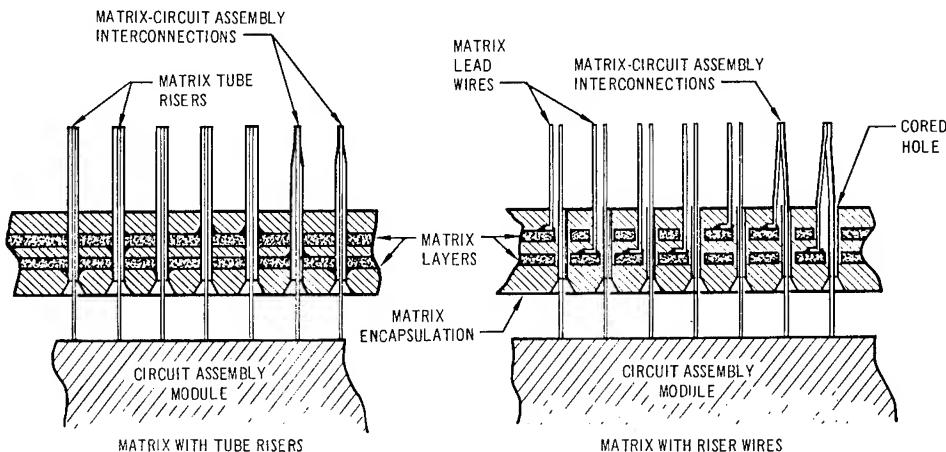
Cross section through assembly of a circuit assembly and matrix.
